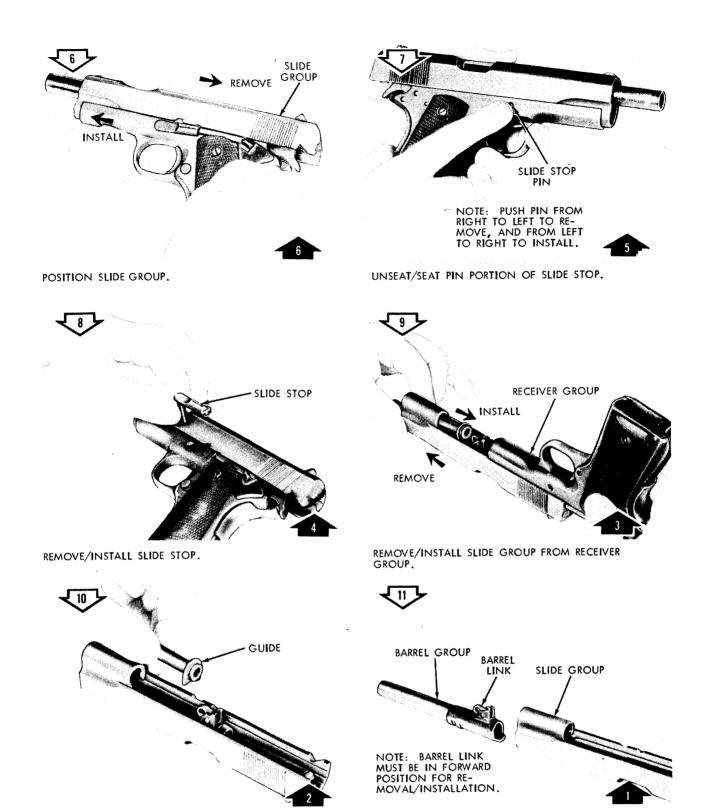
Operator's disassembly/assembly of Caliber .45 Automatic Pistol, M1911A1. (8 of 8)
